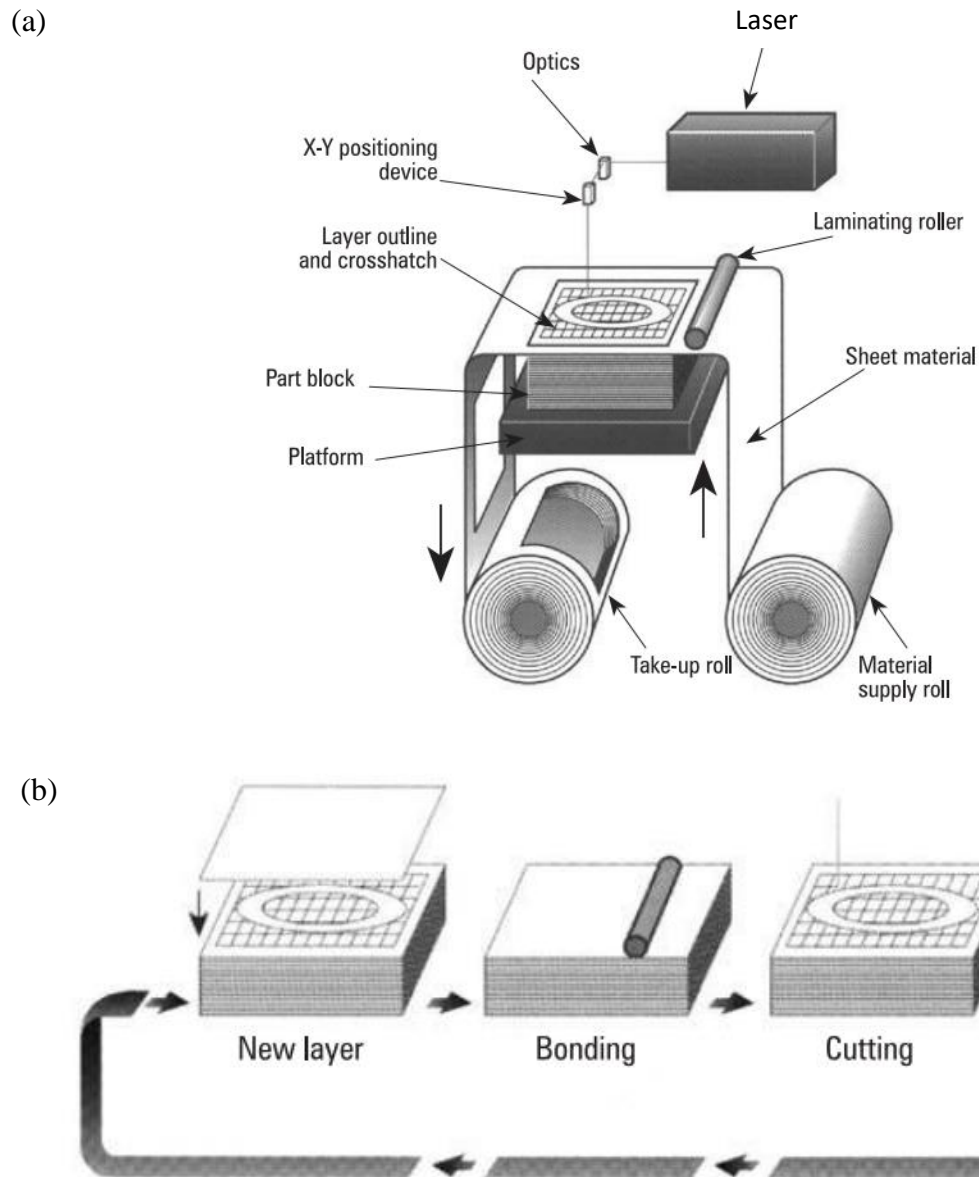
(a) Mechanism of the LOM machine. (b)LOM building process. [70]
